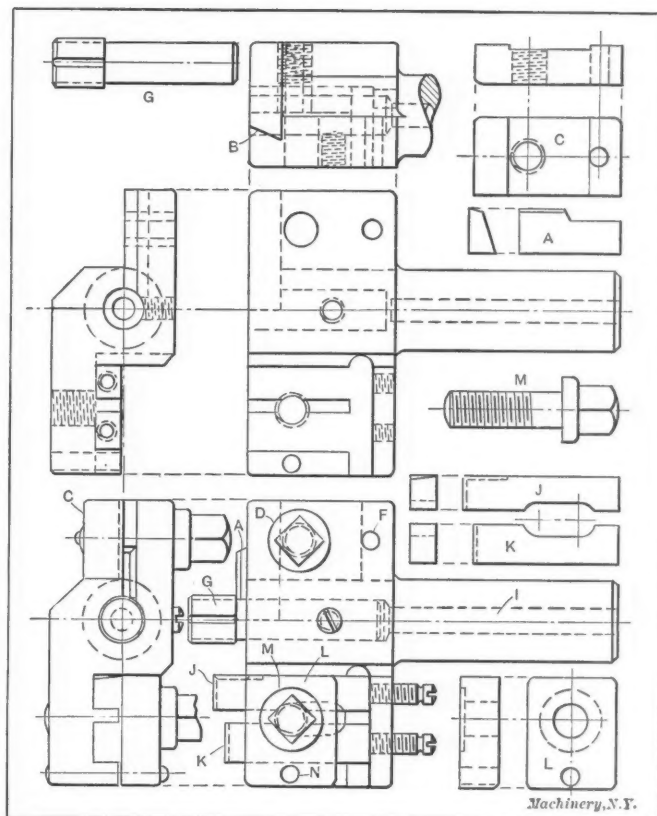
Tool for Facing the Extension Hub Side of the Pulley
